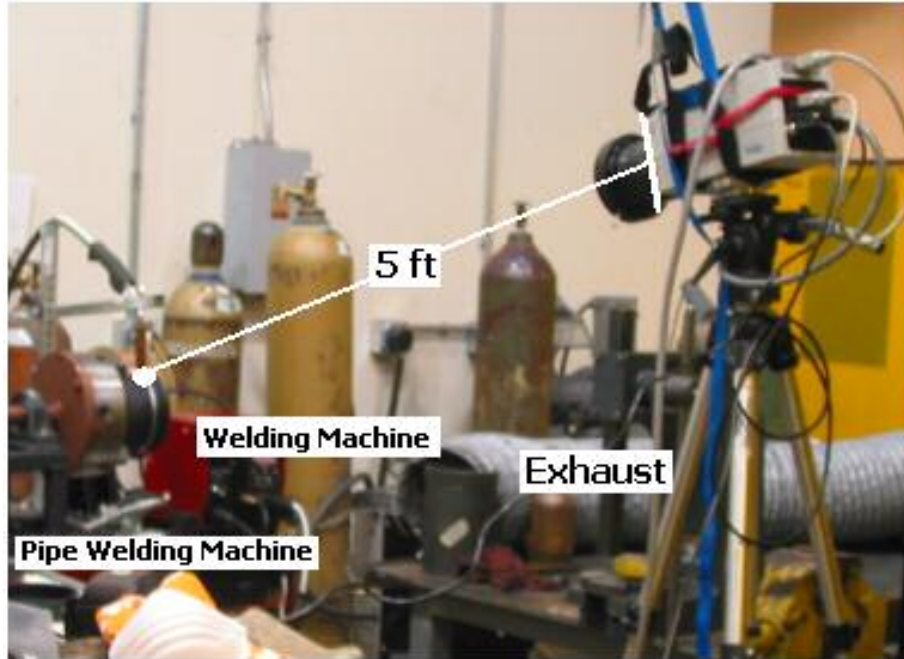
Infrared camera setup during welding, in reference to the pipe welding machine
